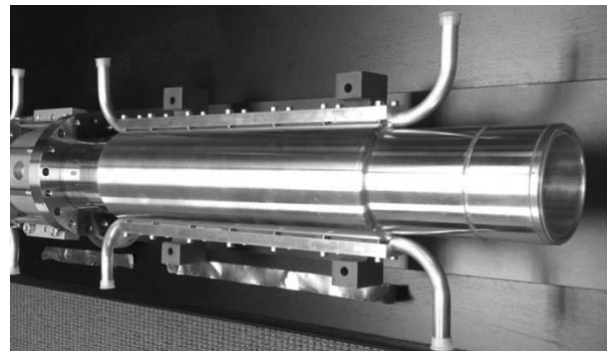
Prototype 63.5 mm ID waveguide with clamp-on copper cooling tubes.
